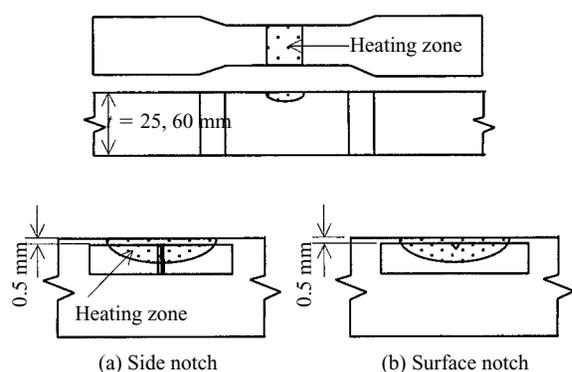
Preparation of tensile test specimen and location of V-notch Charpy impact specimen
